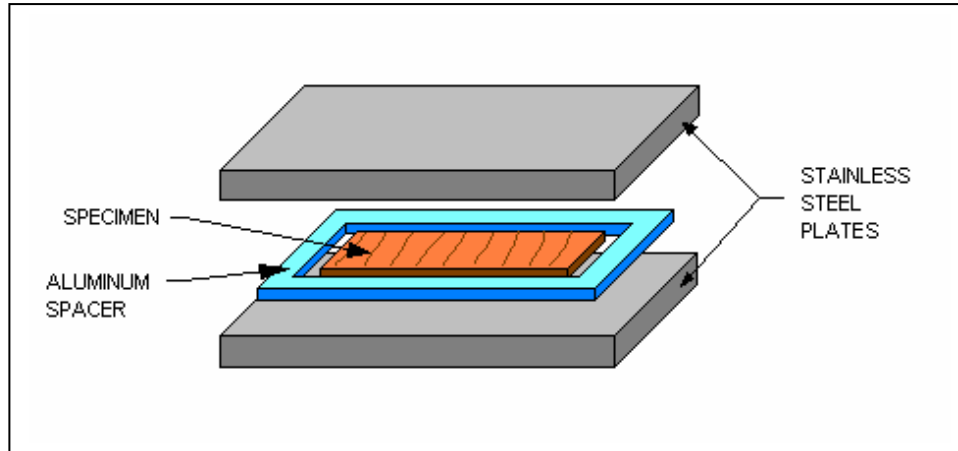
Stainless steel plate, aluminum frame, and wood arrangement for one panel in a stack.
